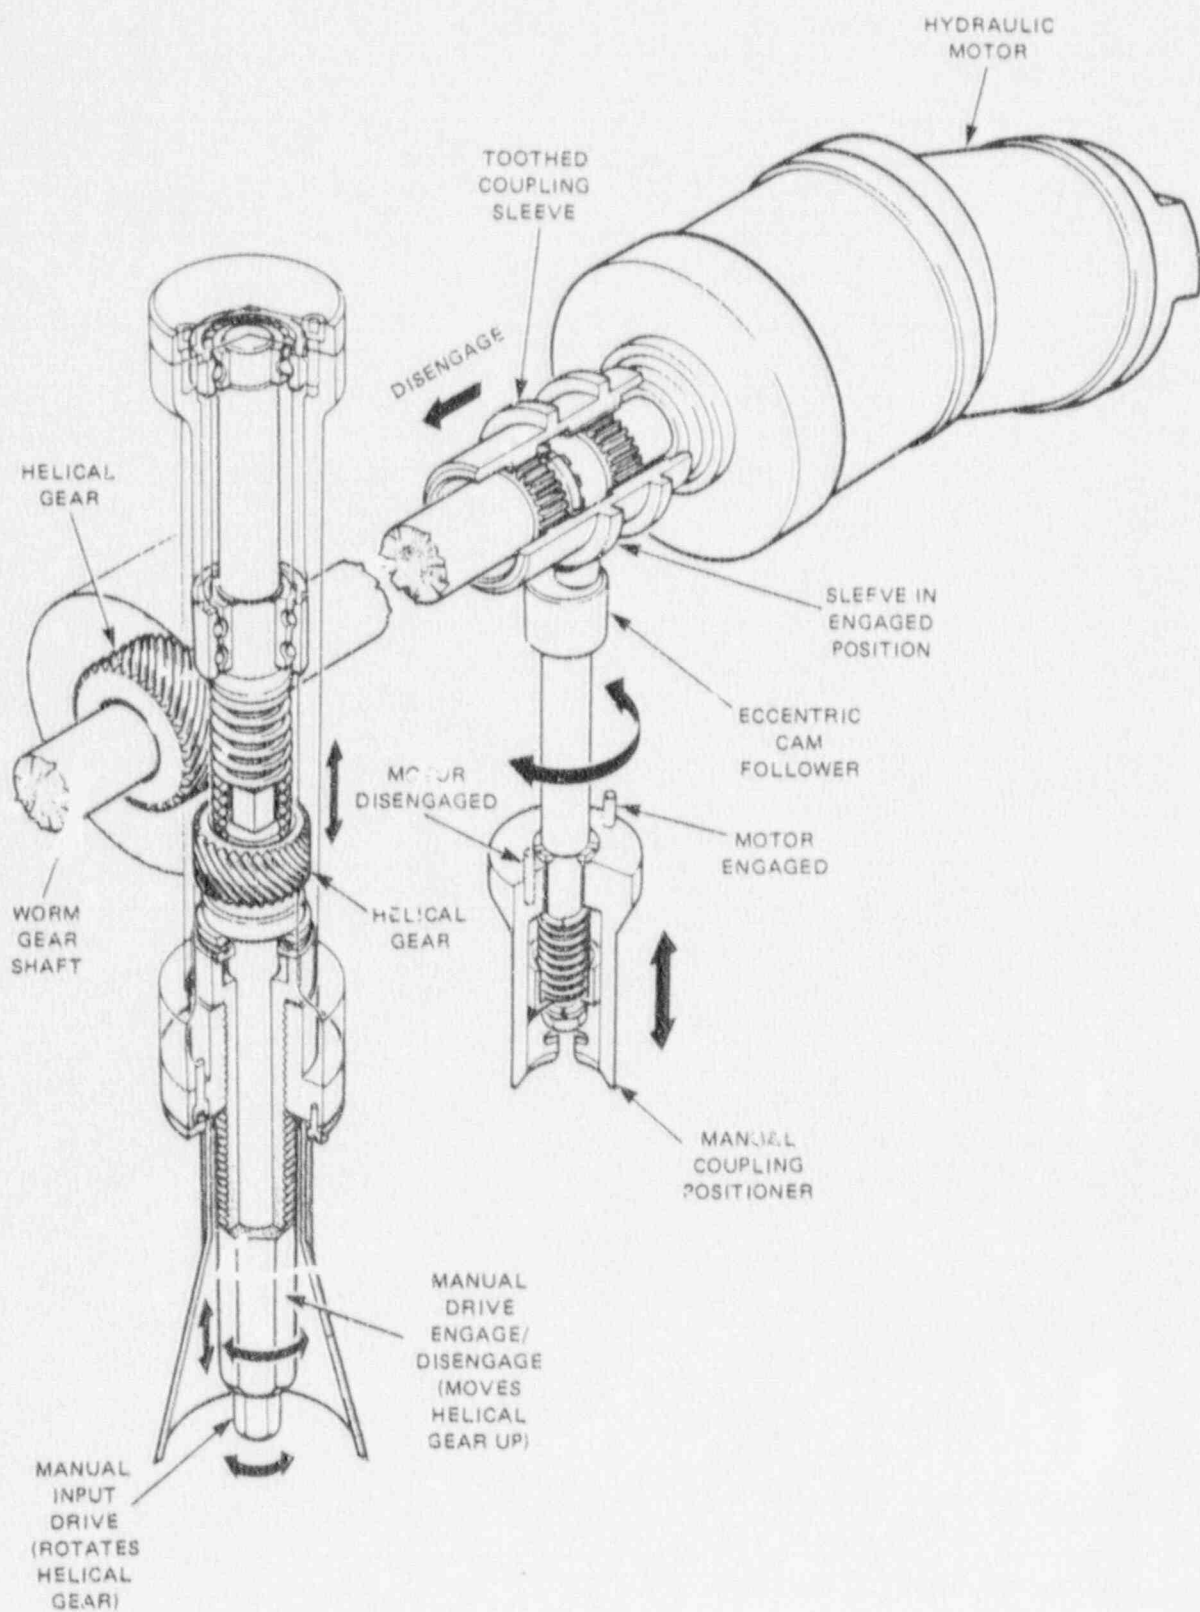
'B' RAM/LATCH RAM MANUAL DRIVE ASSEMBLY
